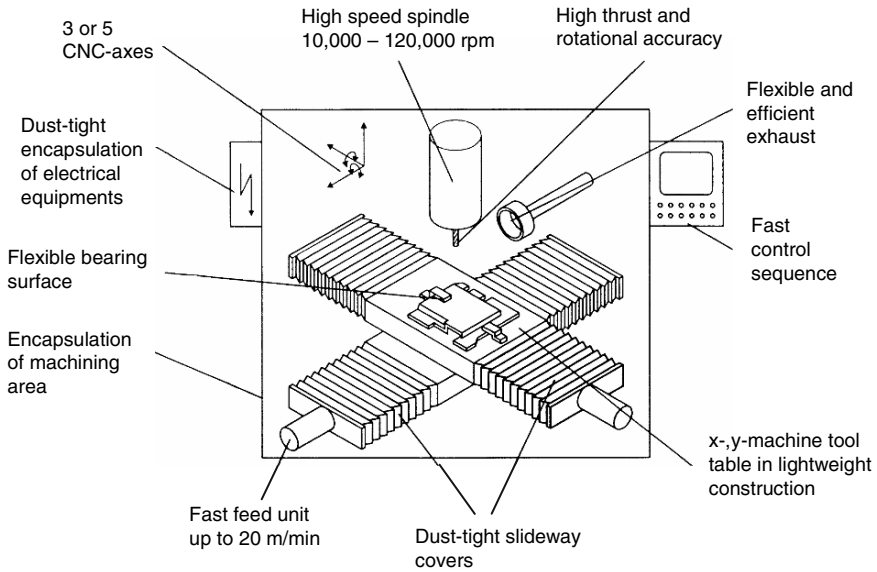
Recommended configuration of milling machine for machining FRPs [16]
